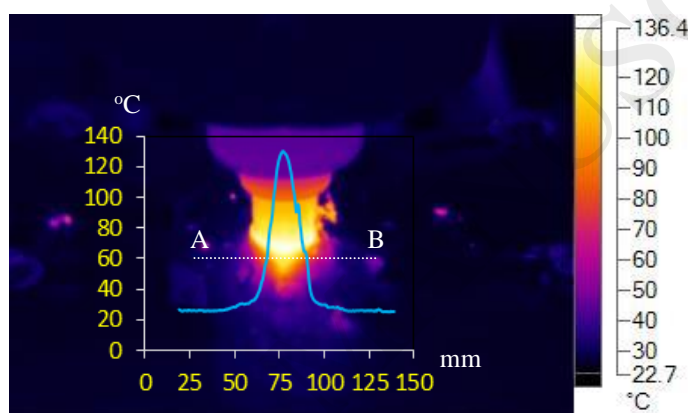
Temperature field on the top surface of the HDPE sheets for welding condition of 800 rpm, 20 mm/min and 4.2mm penetration depth. Trace shows temperatures along line AB just behind the tool shoulder with the advancing side on the left of the image.
